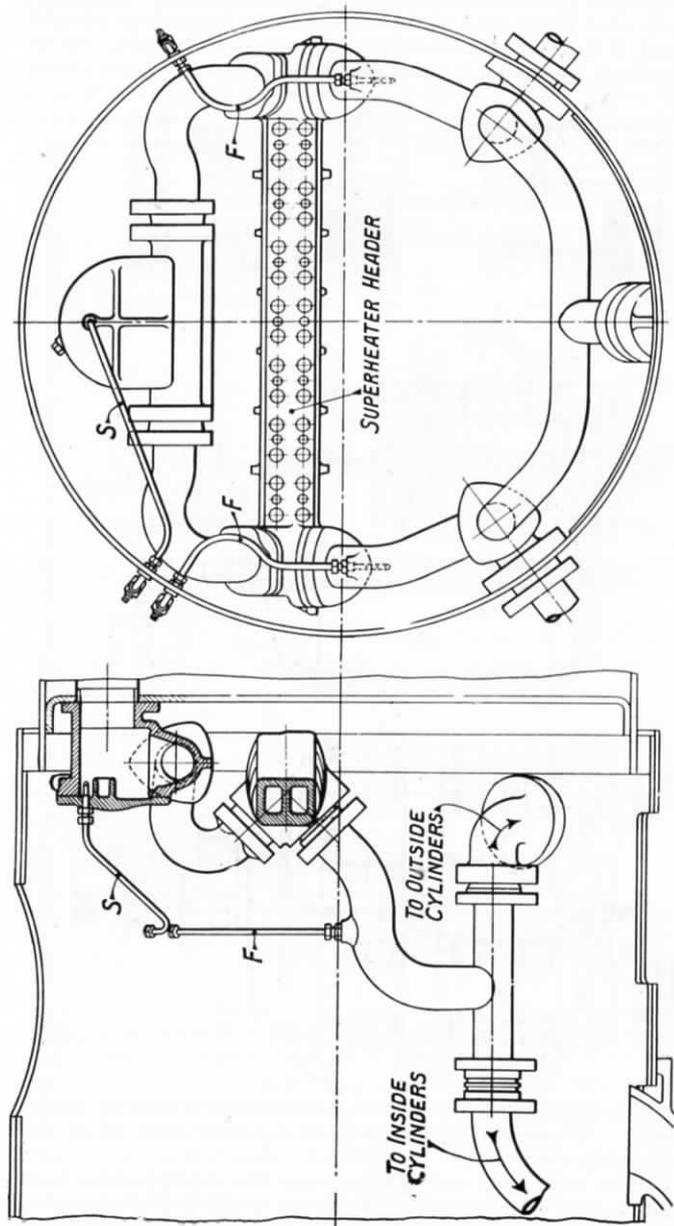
LUBRICATION OF FOUR-CYLINDER ENGINES WITH SUPERHEATER, G.W.R.
